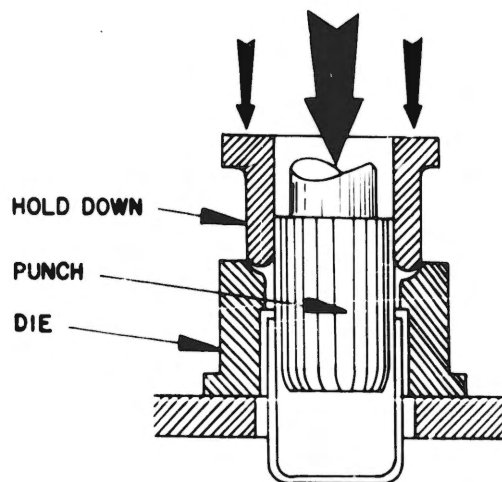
Typical Toggle Draw (Through Redraw) Operation
